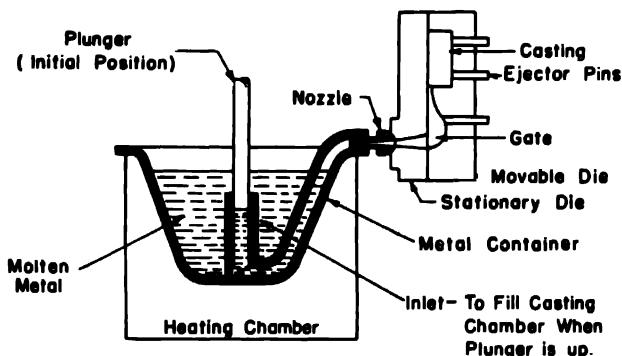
Typical piston-type die-casting machine. The plunger, heating chamber, metal chamber, and die carriage are parts of the same machine.
